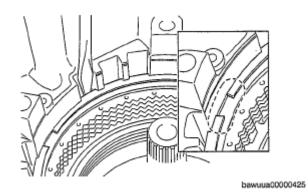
Inspecting Number And Order Of Retaining Plates, Drive And Driven Plates Courtesy of MAZDA MOTORS CORP.
